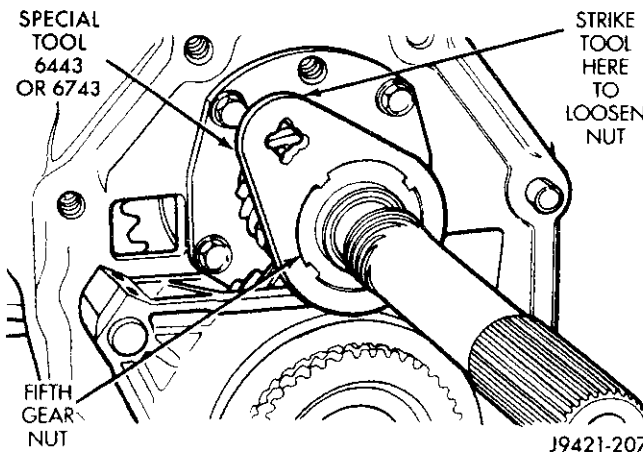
Installing Nut Wrench On Mainshaft Fifth Gear
